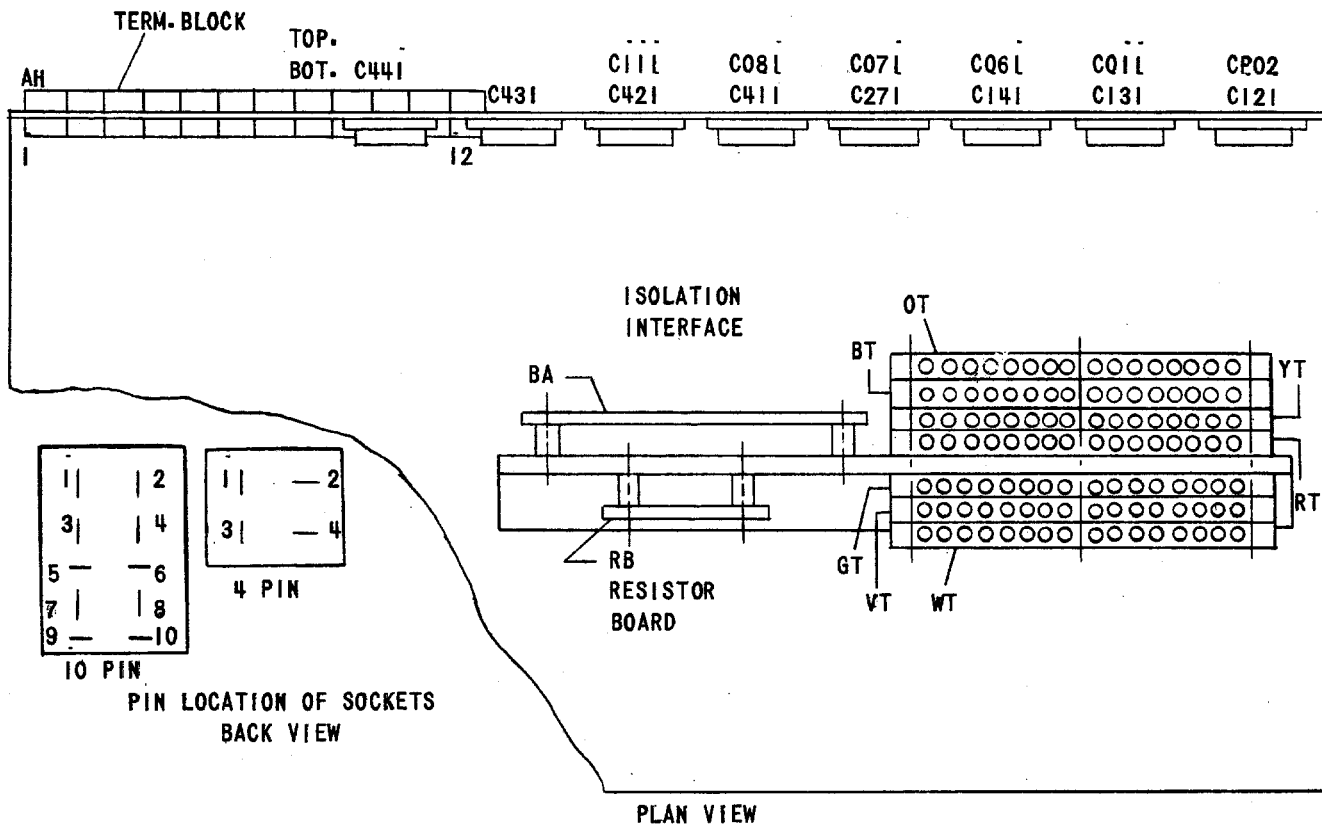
(0227A2037-0) OUTLINE AND MOUNTING DIMENSIONS FOR THE TYPE SLA52D RELAY
